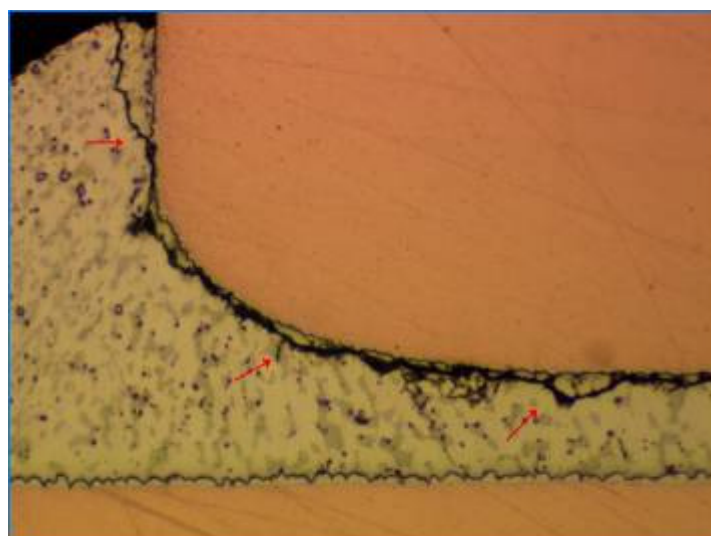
cross section, SN79, U28, left lead solder crack, 400xa
